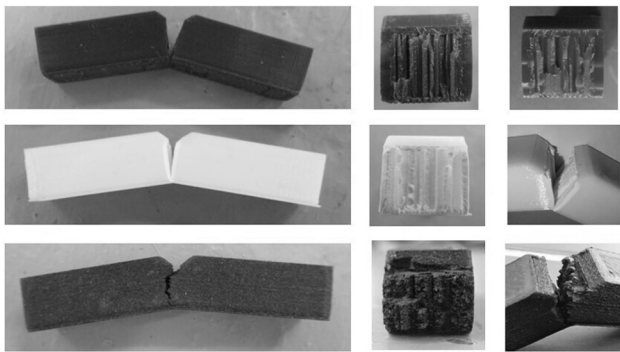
Tested 3D printed impact specimens: PLA (top); PC (middle); PAHT-CF (bottom)
